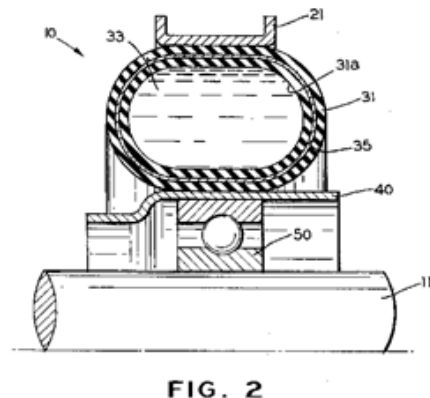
A cross section of the center bearing assembly, where the support structure (31) containing the rheological fluid (33) is seen on top of the roller bearing. Picture from [18].
